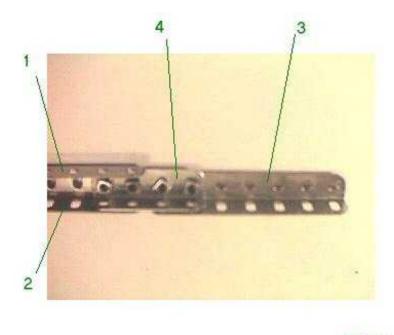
shows the end of the left U girder. A 3 1/2" girder 3 is butted onto the U girder using a 2" girder 4 to straddle the join. A similar girder is bolted to the right side of the U girder, giving a 31 1/2" compound girder overall. This is 1" short on either side of the full wingspan, which is therefore 33 1/2" overall.
